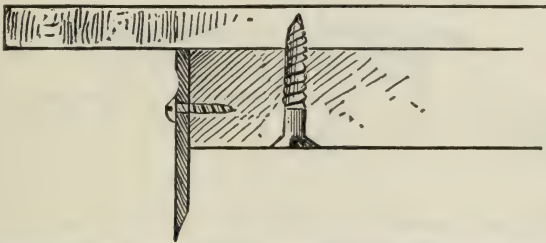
Section showing how the form block is screwed to its base, and mode of securing the steel cutter to the block.
